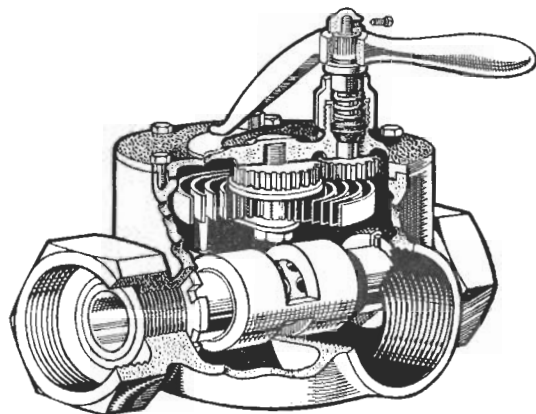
Sectional arrangement of thermostatic steam and water mixing valve.
